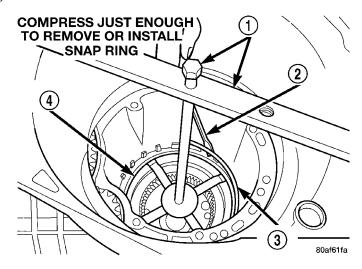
Install 2/4 Clutch Retainer Snap Ring
